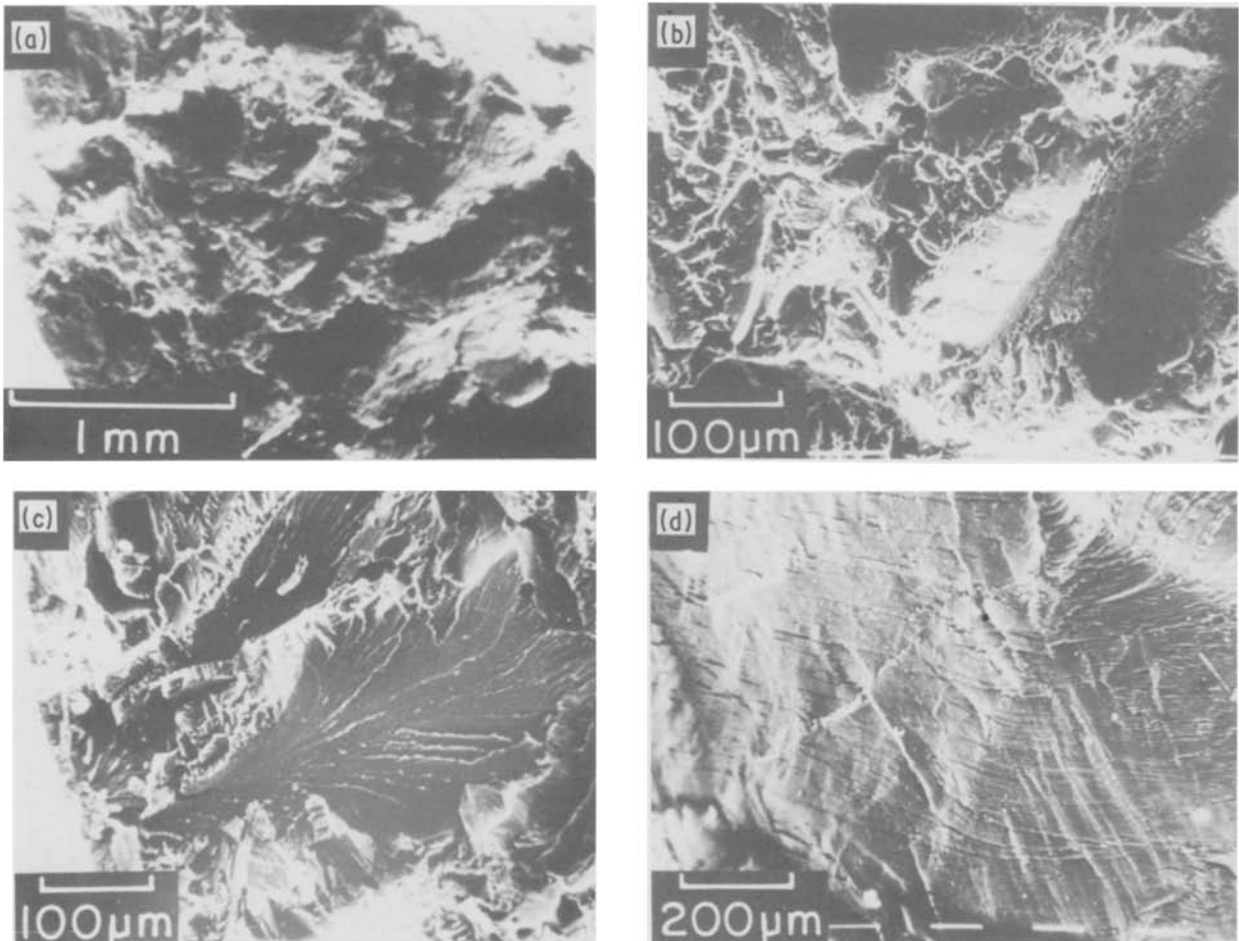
Scanning electron fractographs showing quasi-cleavage fracture in WQ specimen tested in tension at 773 K: (a) entire fracture surface (absence of shear lip zone may be noted), (b) magnified view of the central region in (a) showing a mixture of faceted regions and dimples, (c) cleavage facets with typical river pattern in peripheral region, (d) slip bands and grain boundaries on smooth surface close to the fracture surface.
